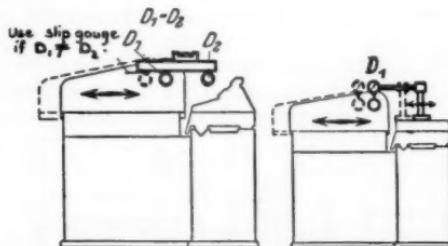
, b.—Checking height of grinding spindle during its cross movement.
